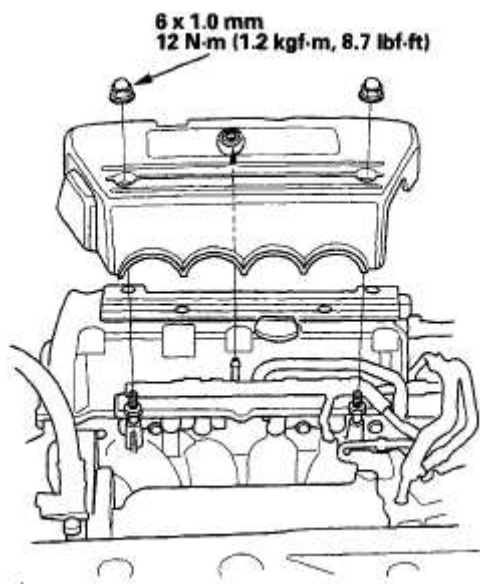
Identifying Engine Cover (With Torque Specifications)
